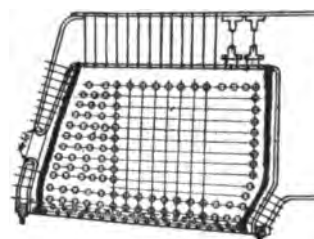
HOW THE FIREBOX IS WELDED.
